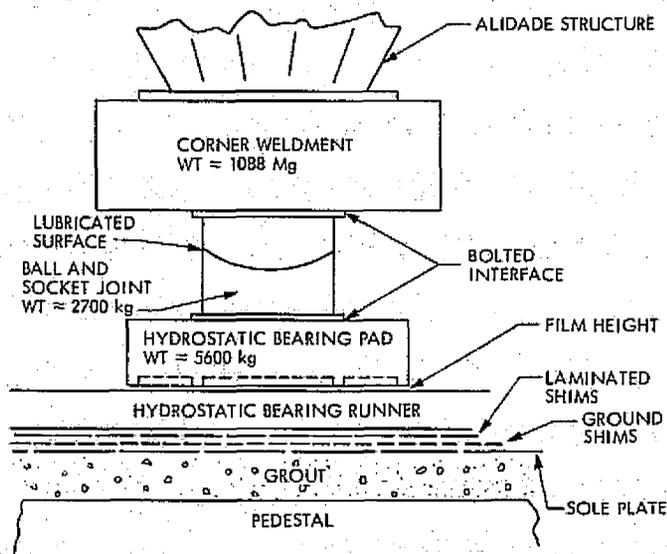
Hydrostatic Bearing and Ball Joint Assembly
